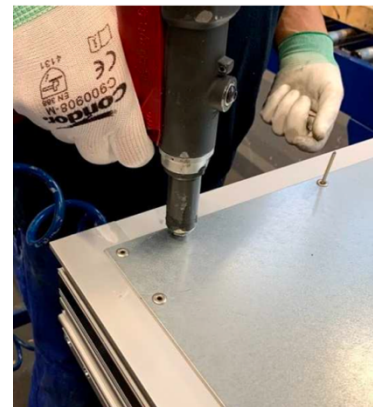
Inserting rivet using rivet gun (image by Scheldebouw).
